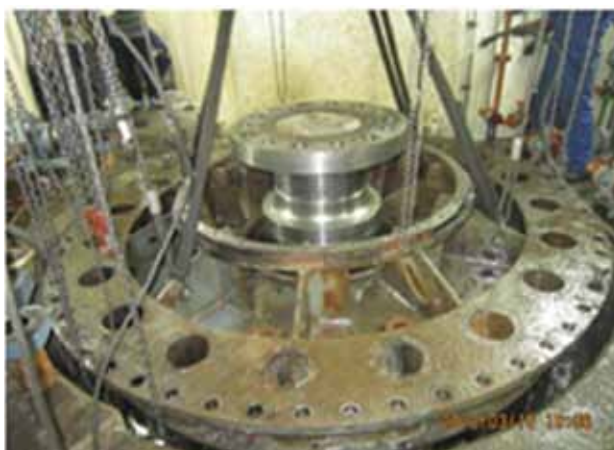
Photos of removing the intermediate shaft and head cover from turbine pit side
